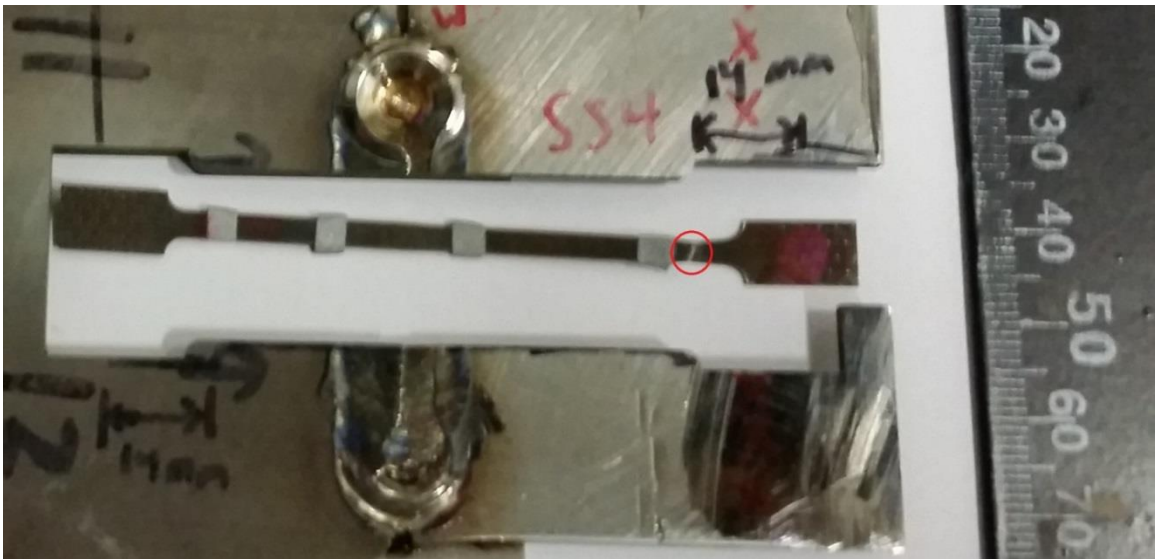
A view of the Weld 9 high temperature tensile specimen, showing where it was cut from in Weld 9. The fracture location of the tensile specimen is circled in red.
